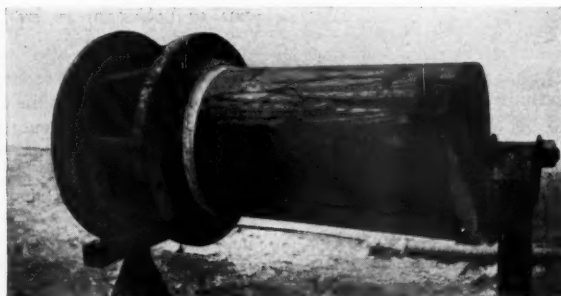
This jig clamps the two parts firmly together and permits rotation of the assembly during welding
